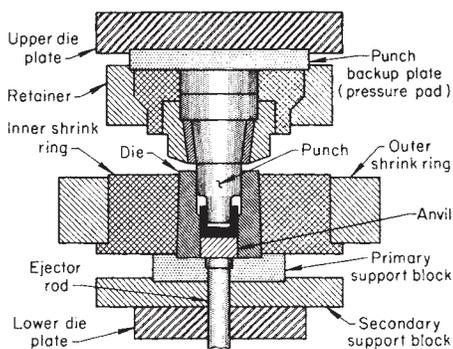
Nomenclature of tools comprising a typical setup for backward extrusion
